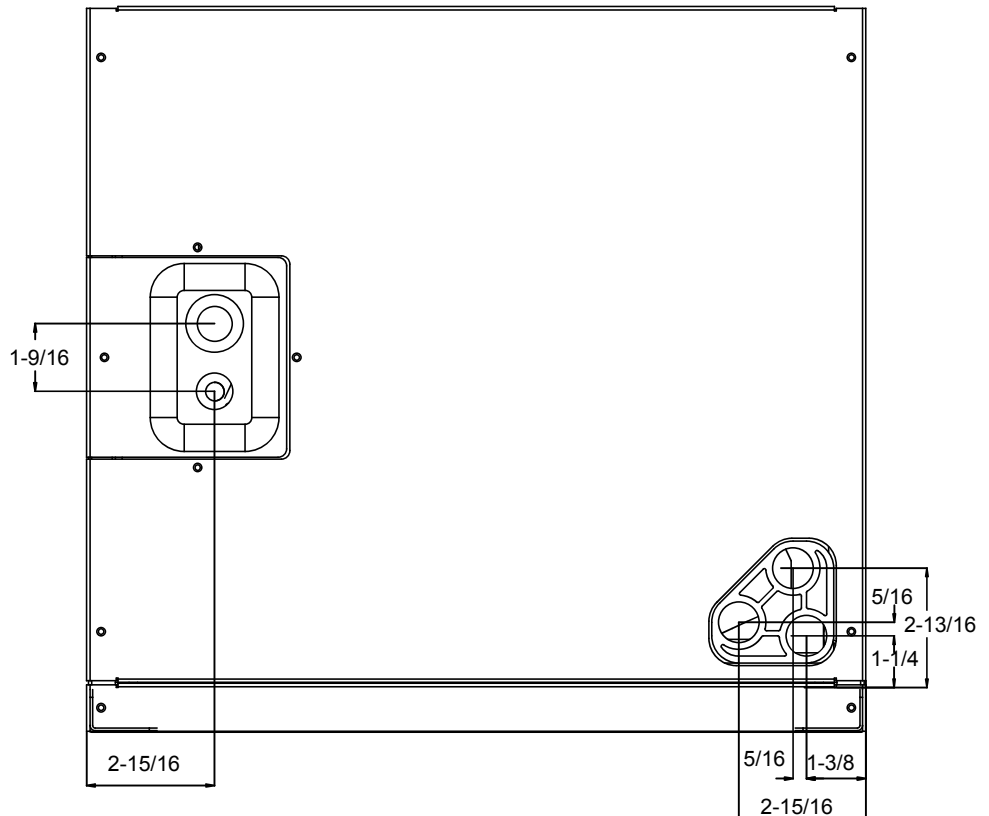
DIMENSIONS FOR FRONT CONNECT COIL
